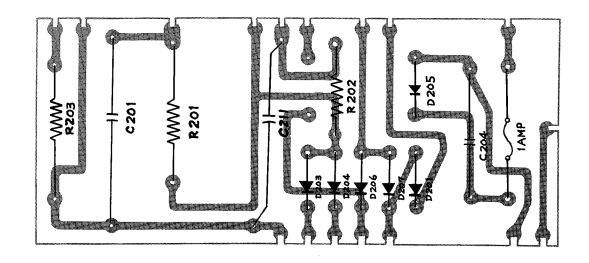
POWER SUPPLY PRINTED CIRCUIT BOARD
